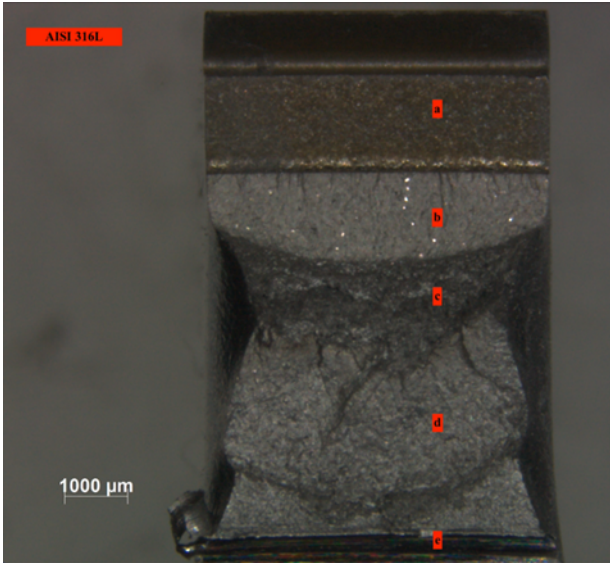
Fracture surface of the AISI 316L SE(B) specimen.
